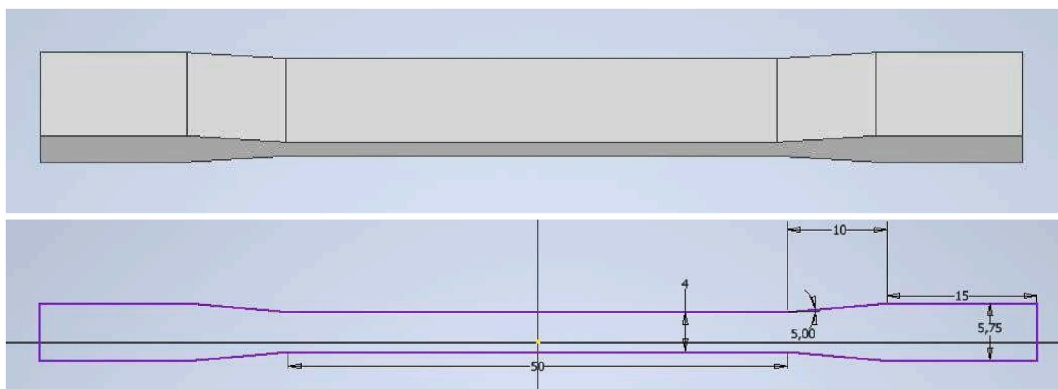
Shape and dimensions of the test piece (units: mm for dimensions and  $^\circ$  for angles).
